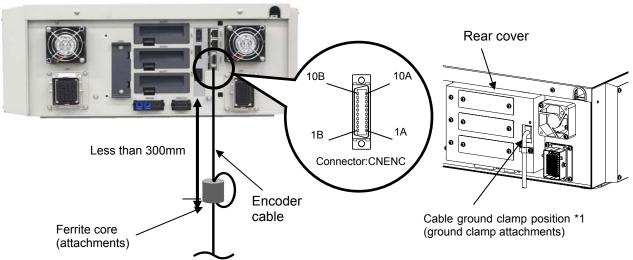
Installation of encoder cable (CR2D-700 series)
